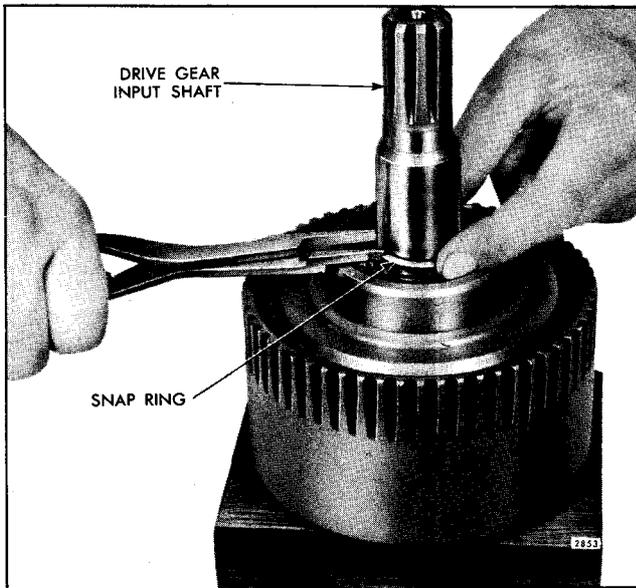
Removing or Installing Snap Ring from/on Drive Gear Input Shaft
